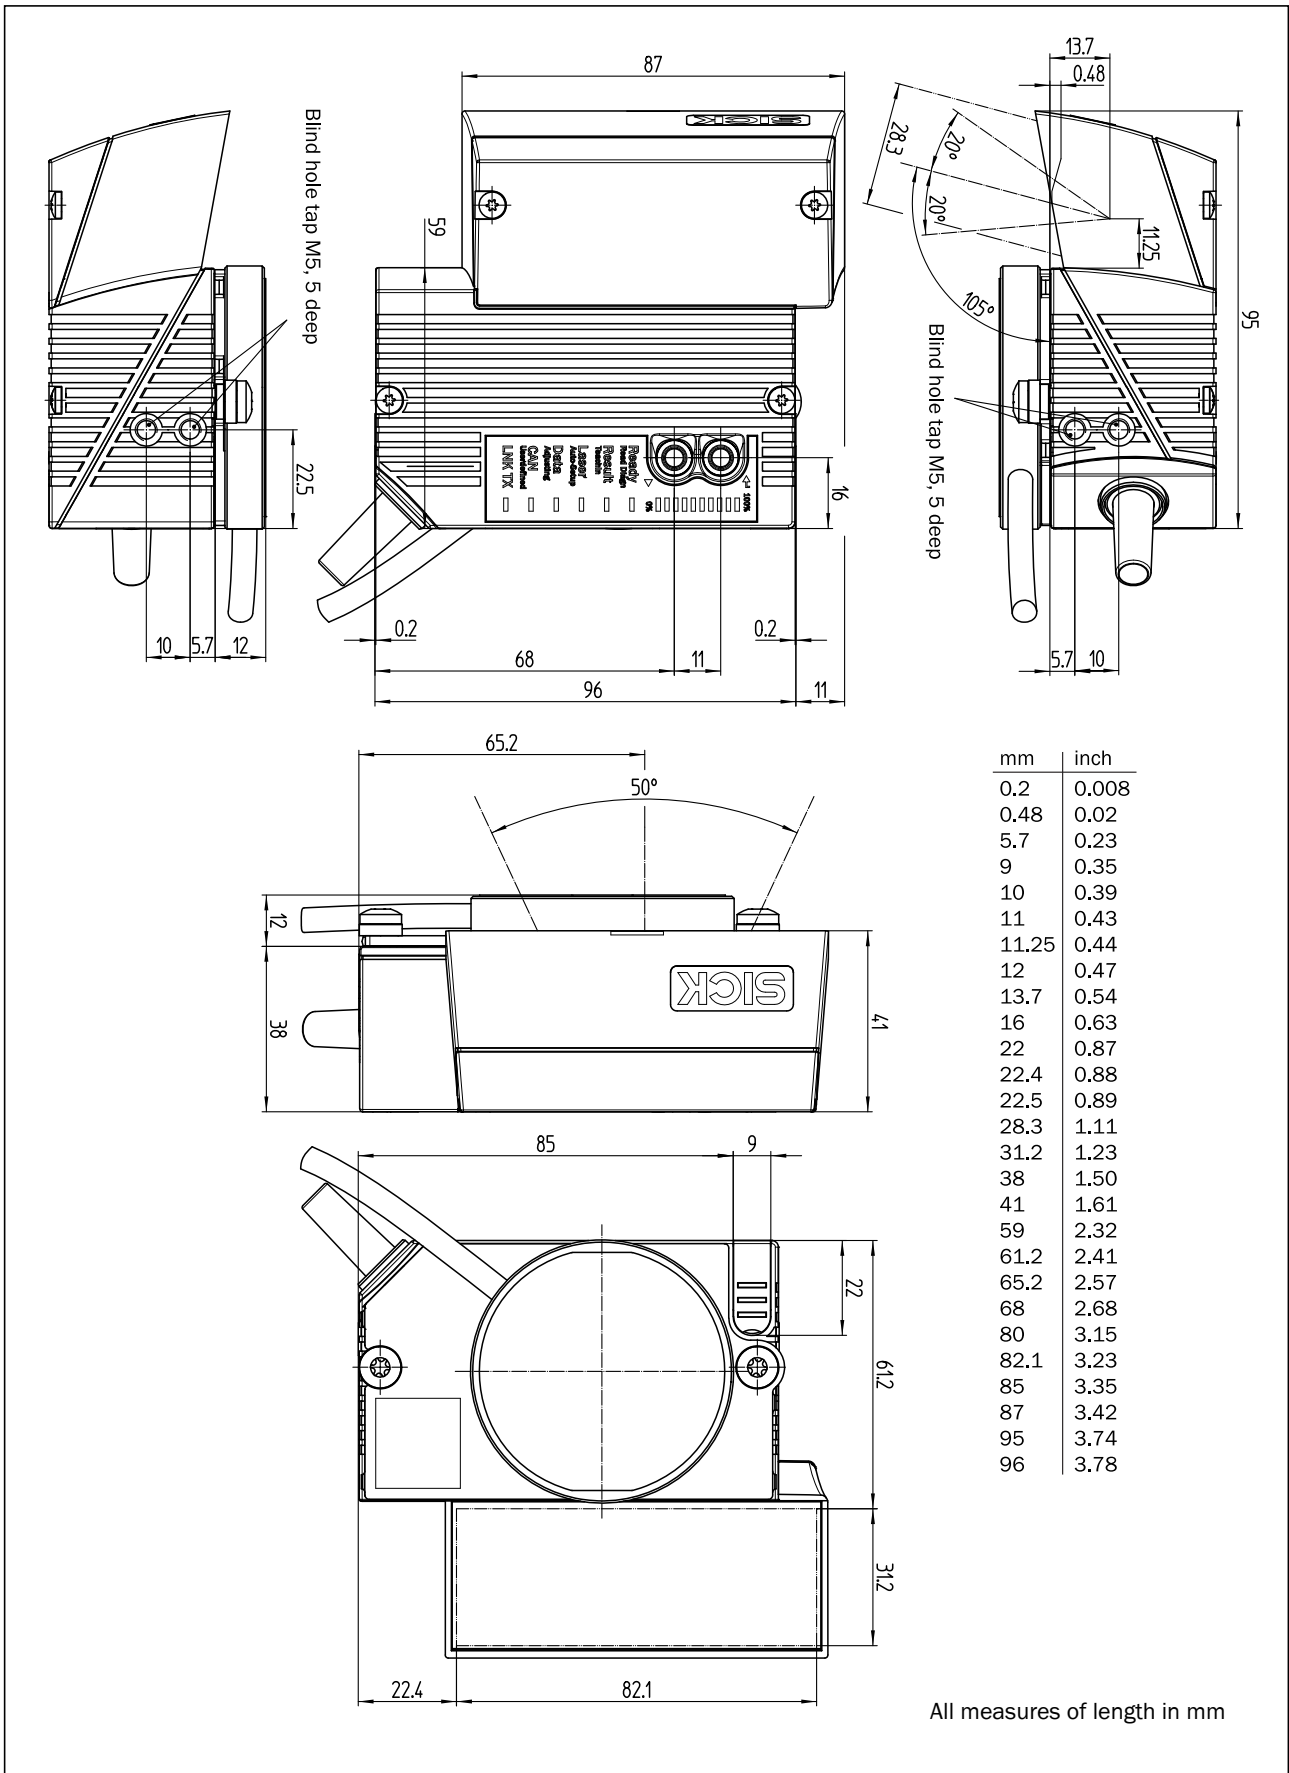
Dimensions of the line scanner with oscillating mirror (side end reading window) and heating
